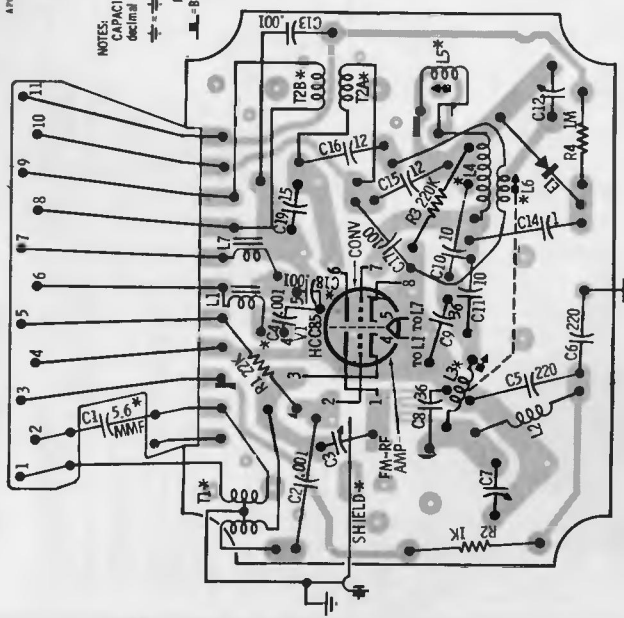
PLATED CHASSIS BOARD WIRING AS VIEWED FROM BOTTOM
